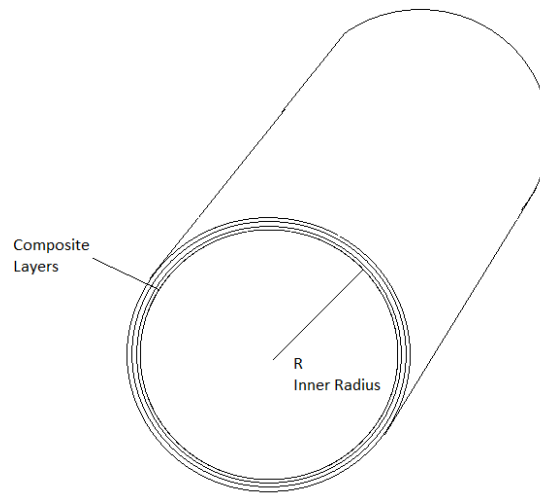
Cylindrical part of the Type V pressure vessel.
